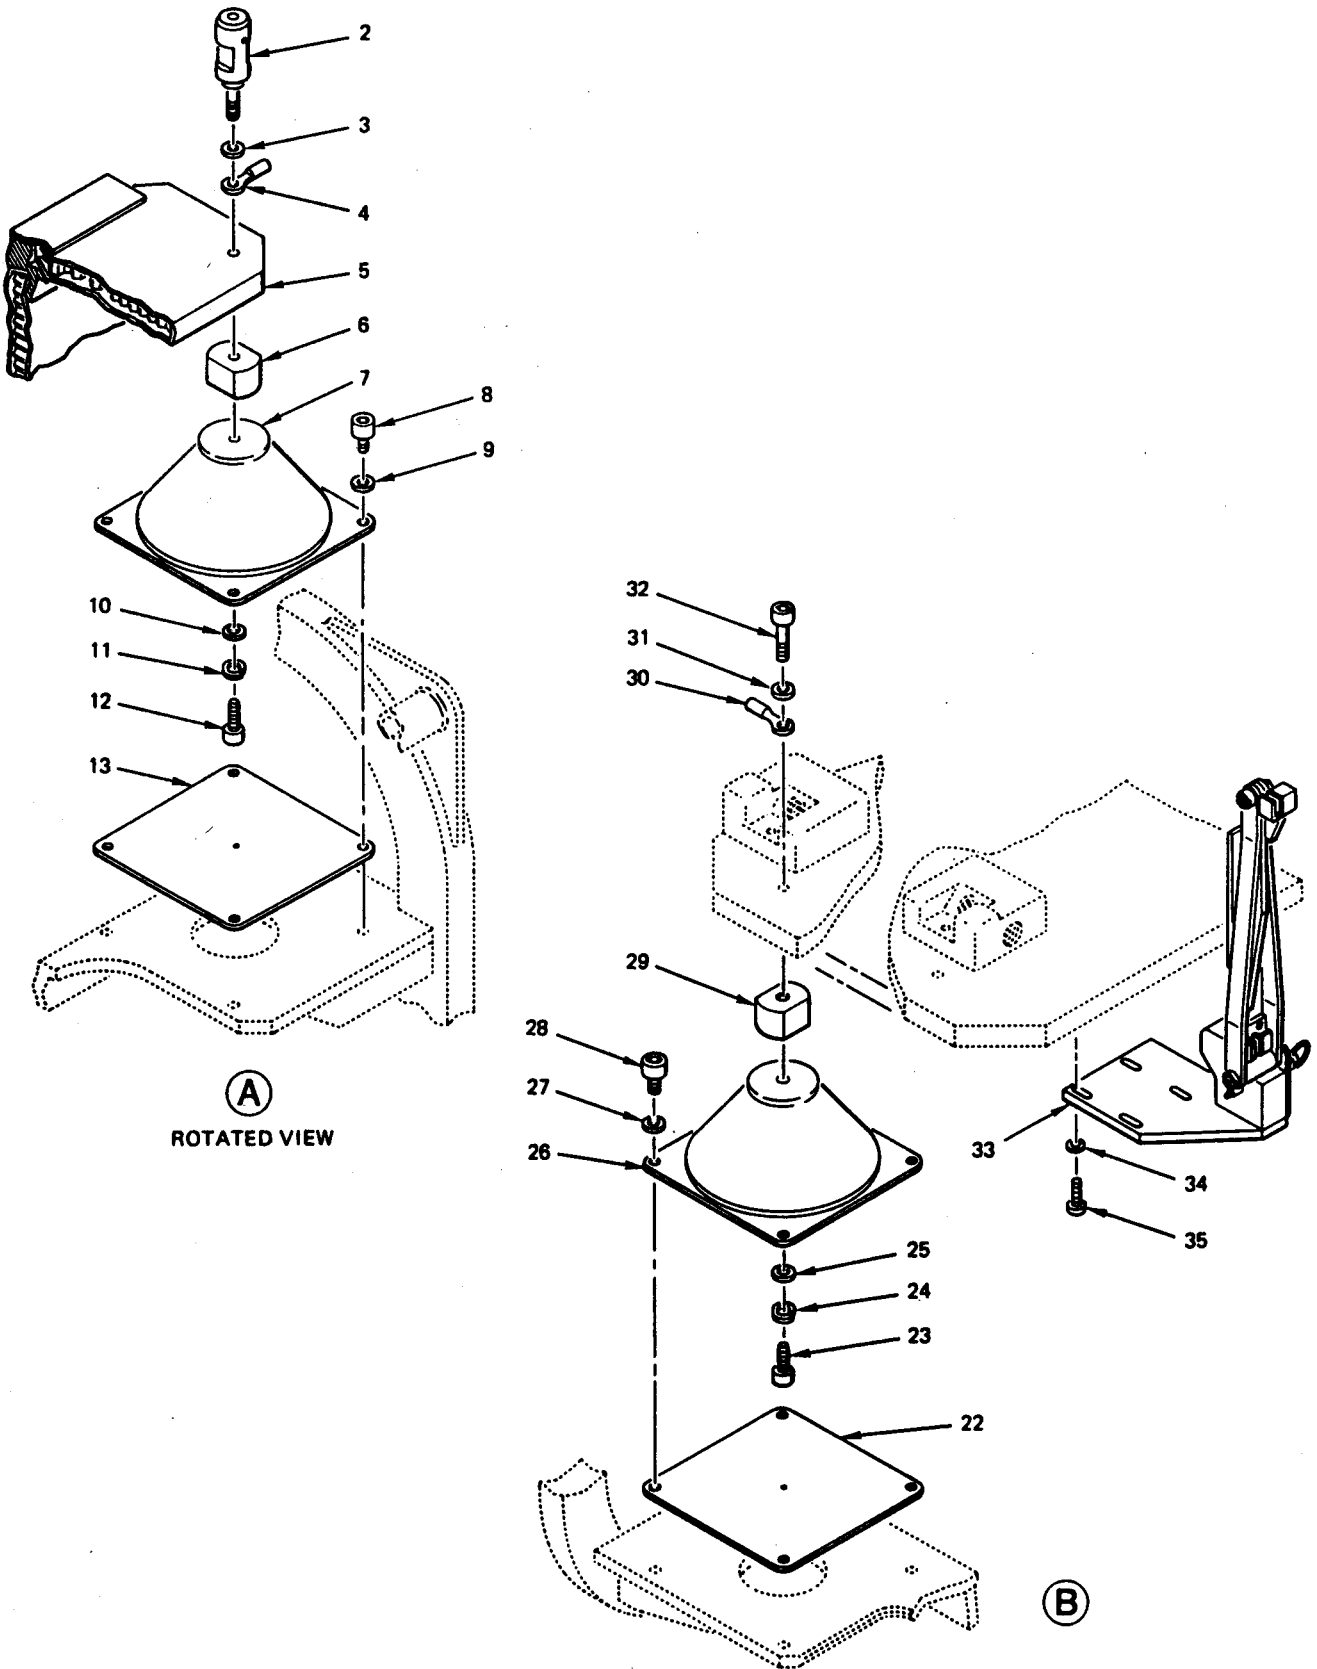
Electrical Equipment Mounting Base Exploded View (Sheet 2 of 2)
